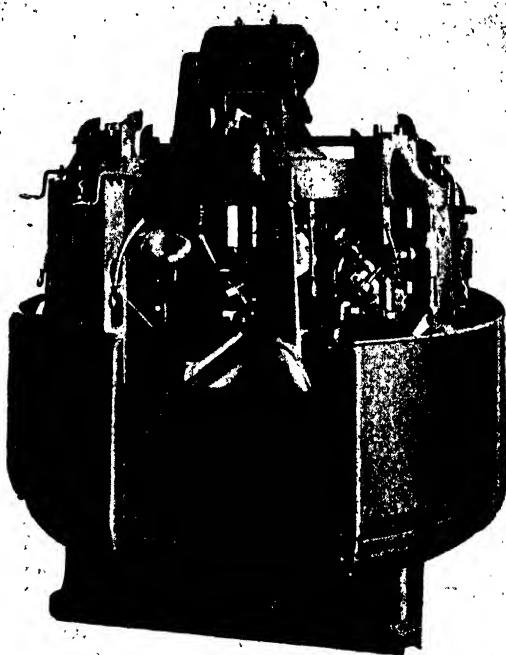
A semi-automatic hobber by the Cleveland Hobbing Machine Company.
